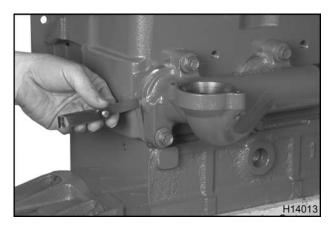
Checking exhaust manifold for cracks and warpage
